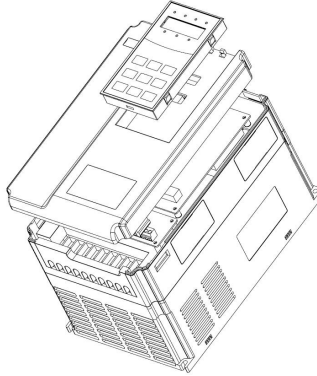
Disassembly drawing of lower cover plate of plastic shell
